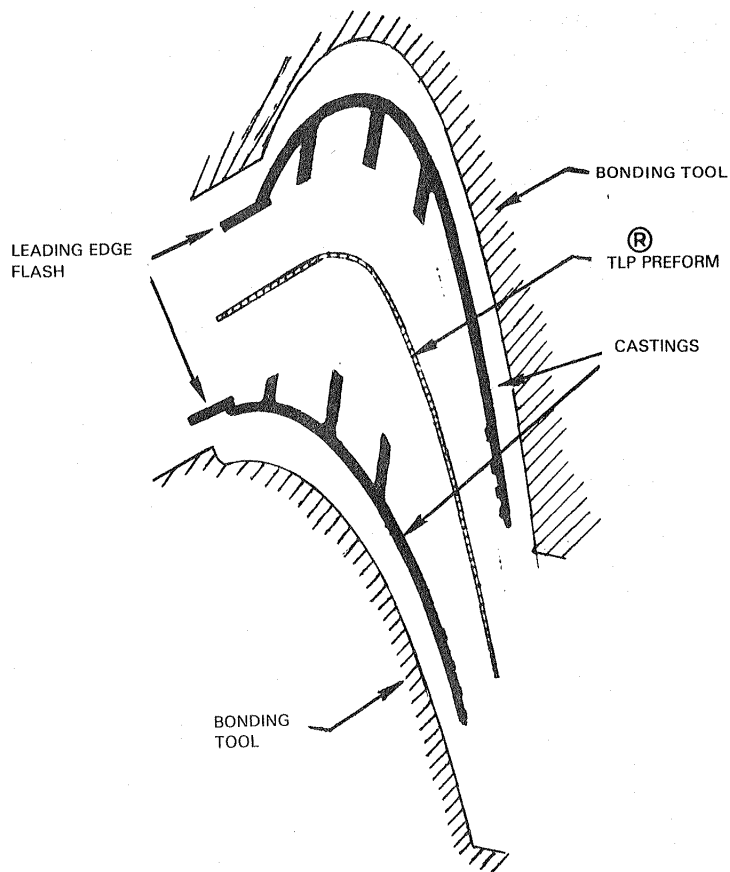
Typical Bonding Assembly for a Two-Piece Casting (Exploded View)
